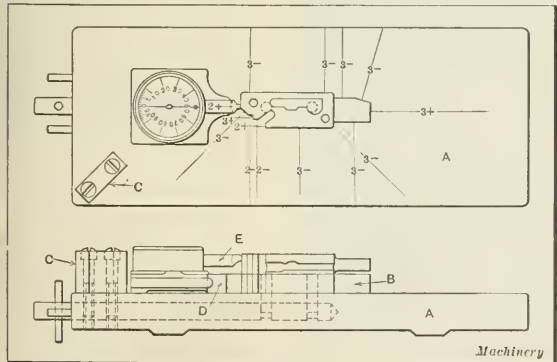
Dial Indicator for inspecting Irregular Work on the Ordinate Principle
